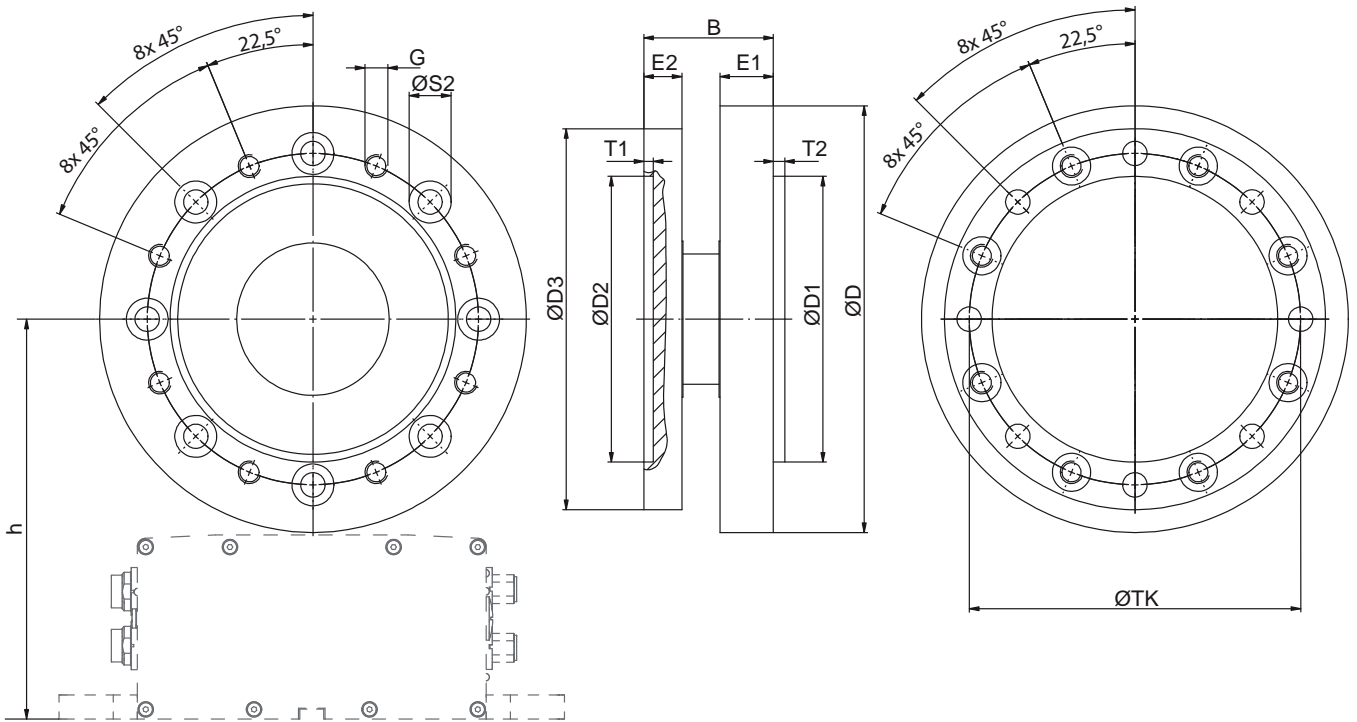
Dimensional drawing of Type 4551A... KiTorq Rotor torque measuring unit
